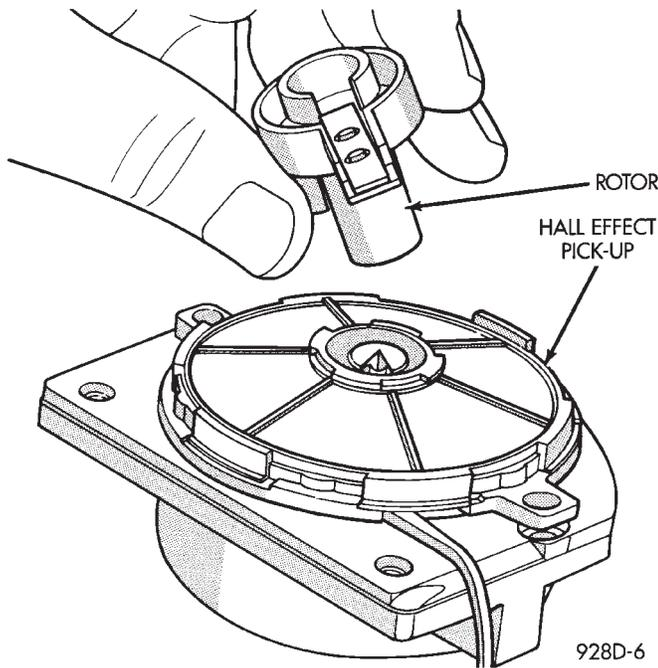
Ignition Rotor—2.2L TBI, 2.5L TBI and Turbo I Engines
